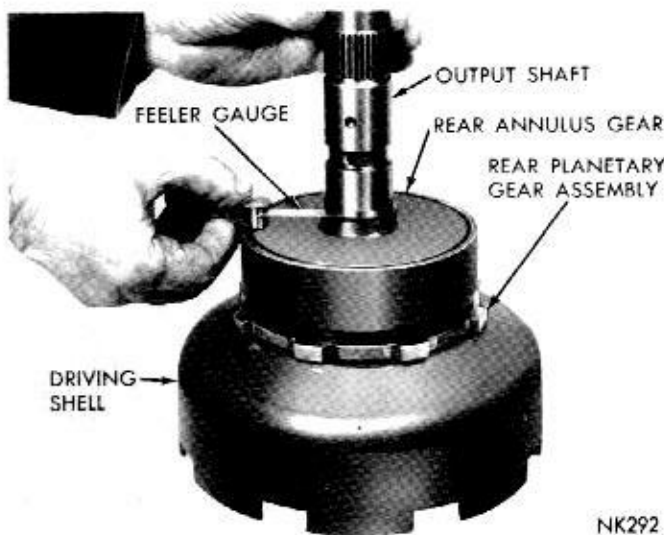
Measuring End Play of Planetary Gear Assemblies
